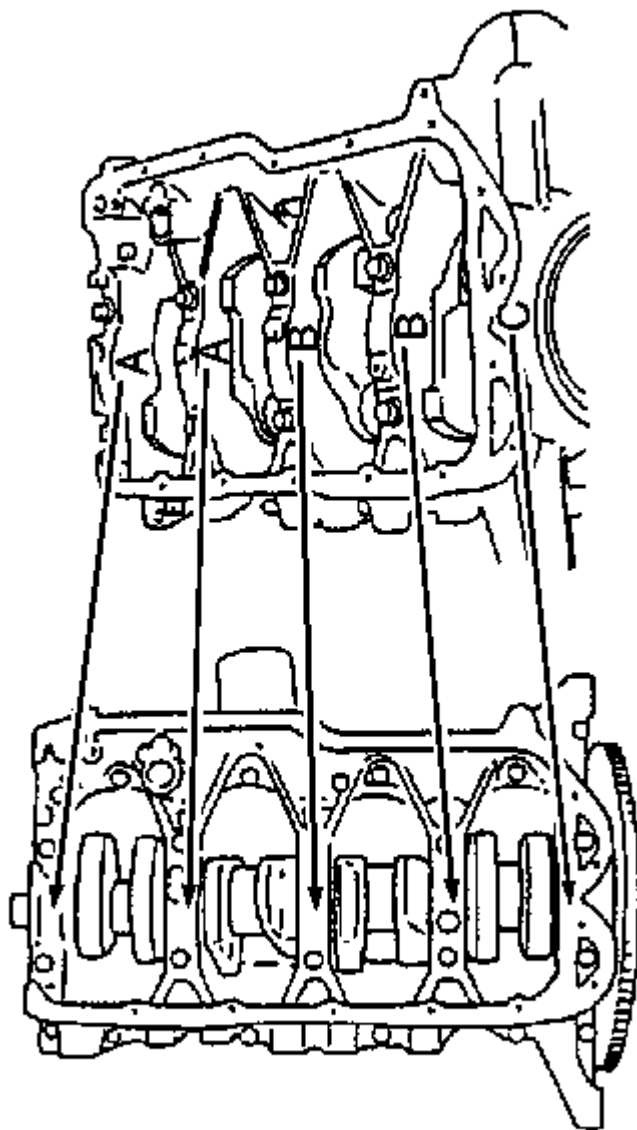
Lower Crankcase Letters Represent Crankshaft Bearing Cap Bore Diameter Without Bearings
